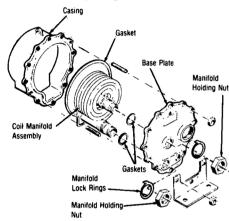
BOOSTER ASSEMBLY, Steam-heated (optional)
